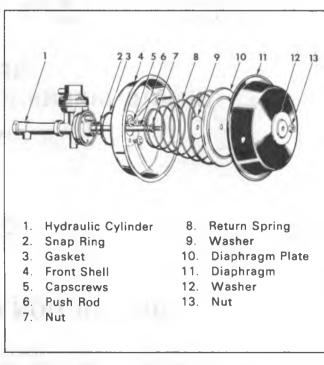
D-Removal of Diaphragm, Spring, Front Shell and Gasket
